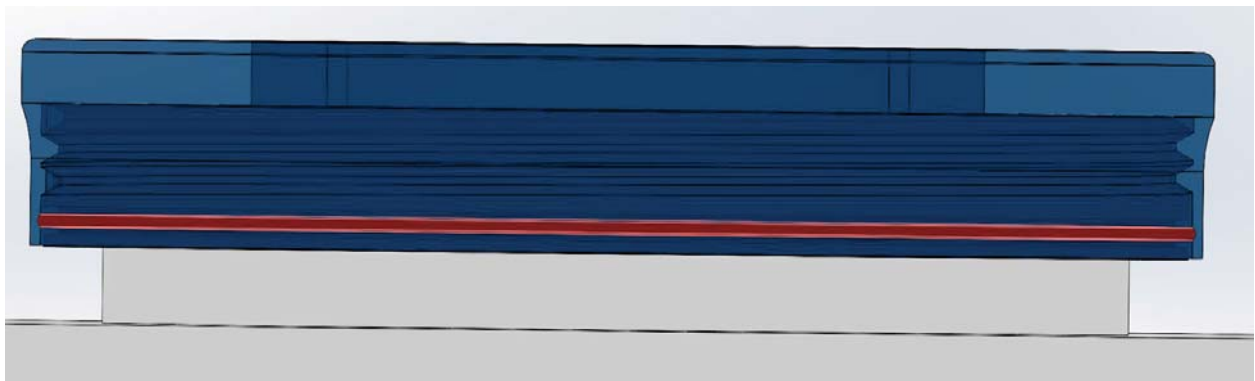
Solidworks screen capture of exploded view for the enclosure assembly.
